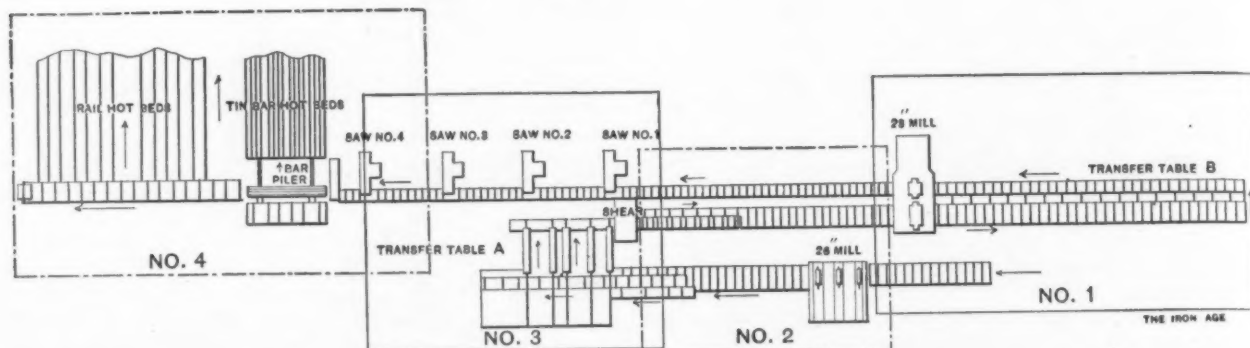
Skeleton Plan of the Republic Iron & Steel Company's Rail Mill. Key to Mill Drawings Shown in Greater Detail in Figs. 2, 3, 4 and 5.
